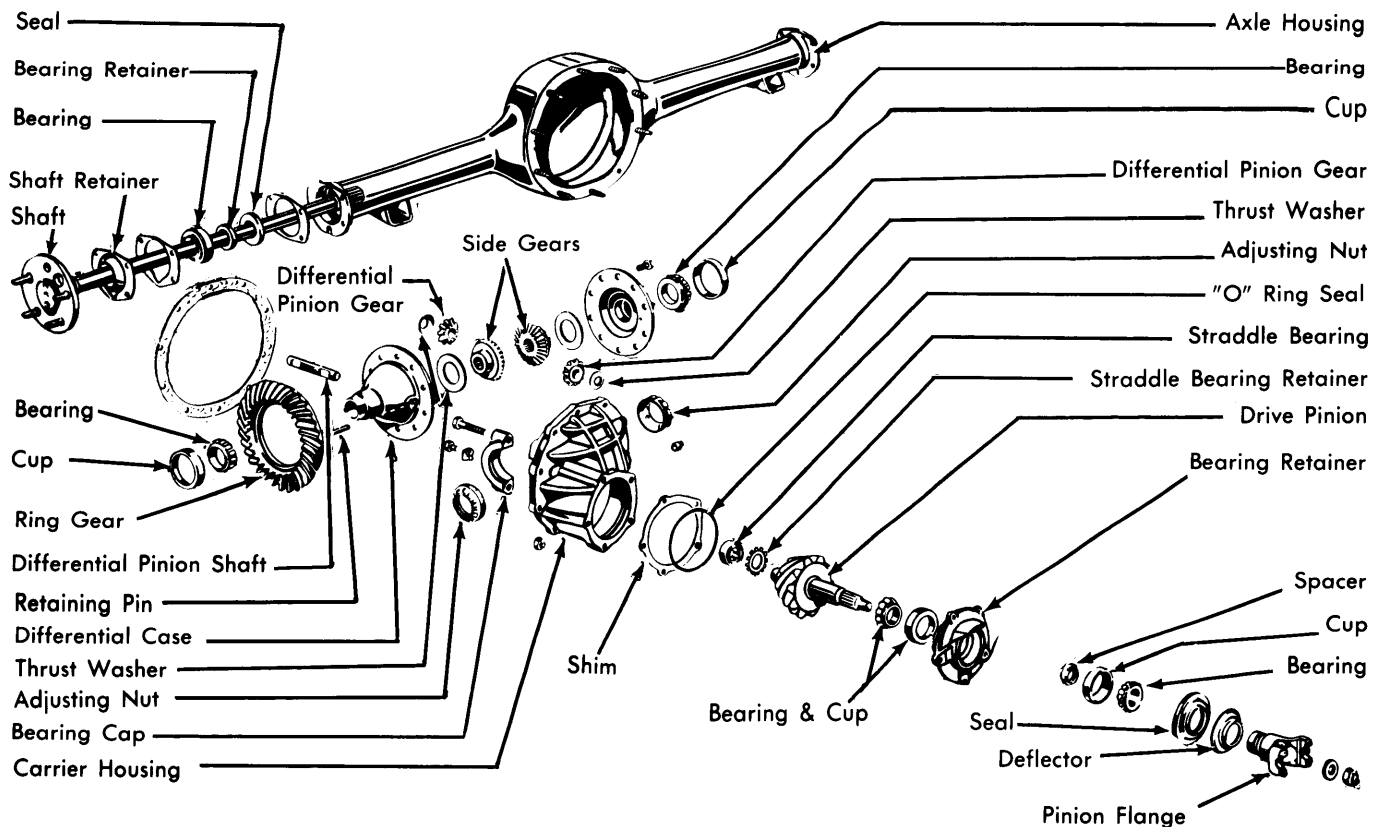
Exploded View of Ford Motor Co. Separate Housing Axle Assembly
